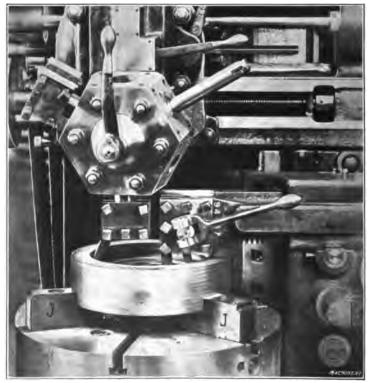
Turning Gasoline Engine Flywheel-Second Position
